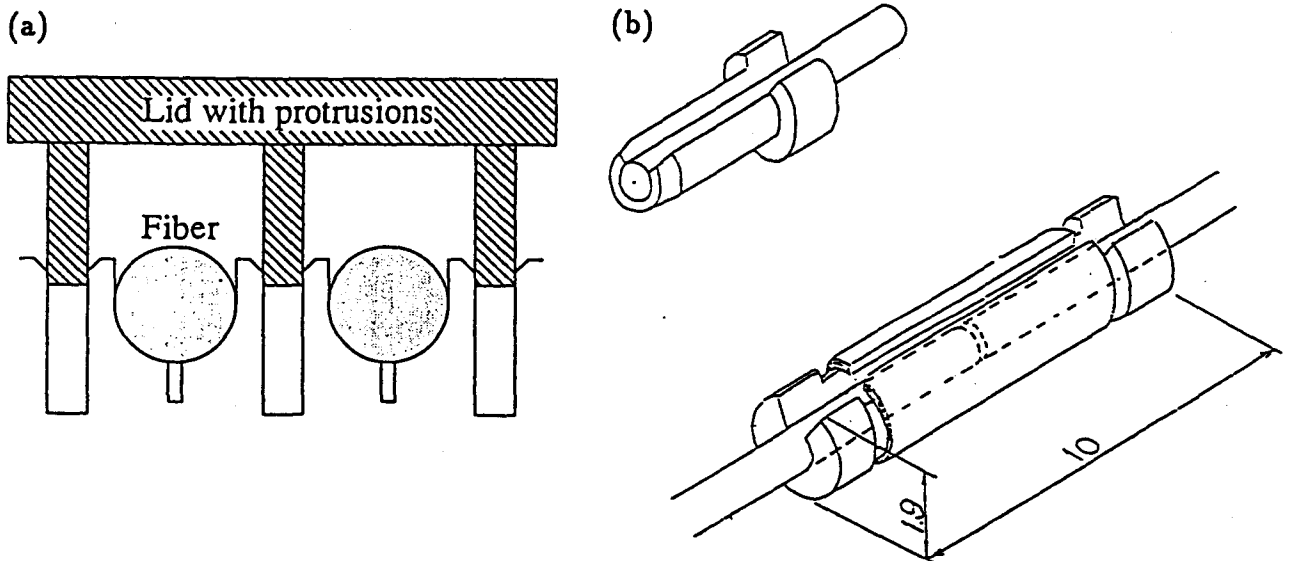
(a) Detailed structure of fiber holding for the 8-ch connector. (b) Smaller 1-ch splicer. The top diagram shows the fiber holder, two of which are inserted into a metal sleeve as shown in the above diagram.
